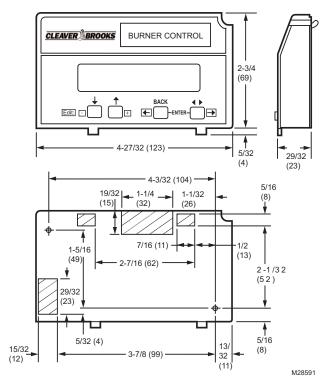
Mounting dimensions of Keyboard Display Module, in inches (mm).
